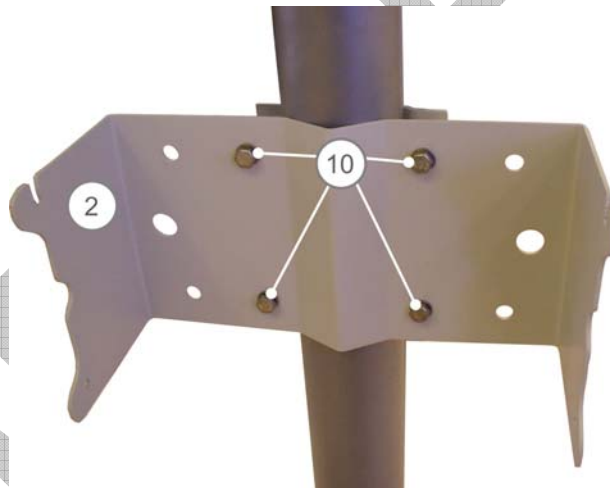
Pole Mounting – Inserting the four 3/8" Screws
